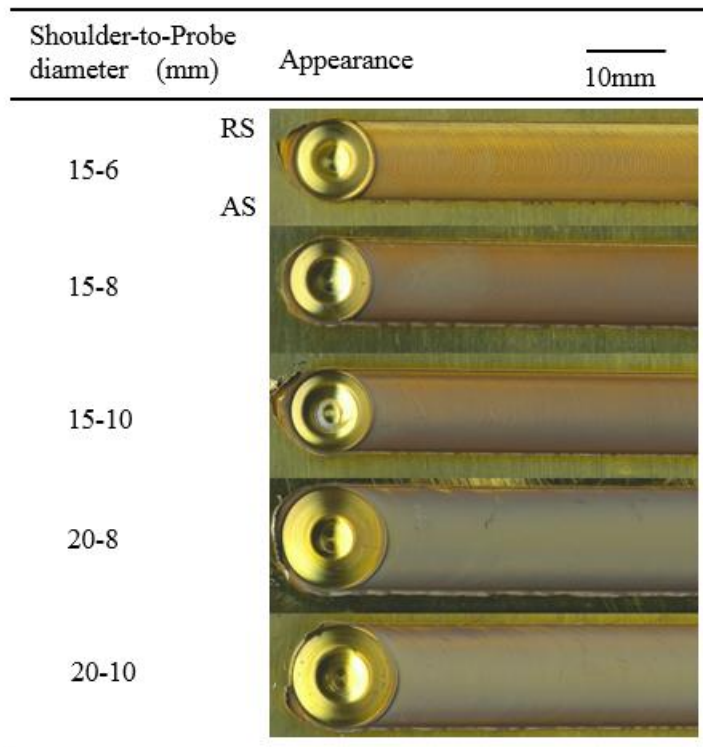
Bead appearances of the joints welded with different tool dimensions of shoulder and probe diameters with 500 mm/min and 1000 rpm.
